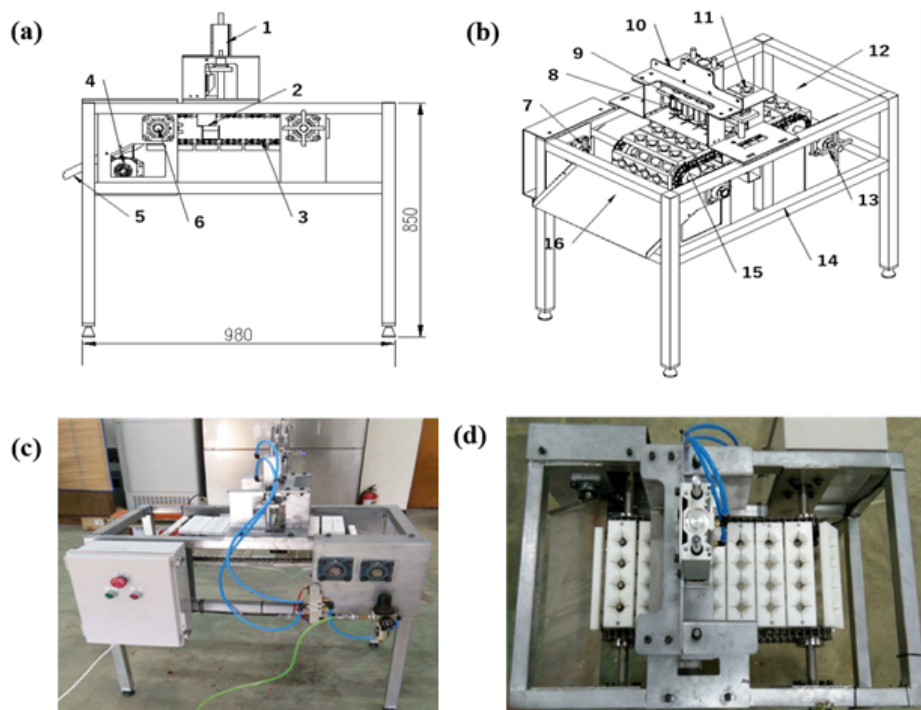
Design and appearance of PSR. (a, b) Schematics of PSR. The numbers indicate the main components of the machine: air cylinder (1), seed collector (2), transmitting chain (3), induction motor (4), flesh outlet plate (5), transmitting shaft (6), Geneva gear (7), cutter (8), cutter attachment plate (9), cylinder support (10), plum positioning hole (11), plum input portion (12), sensing plate (13), main frame (14), plum holding and conveyer tray (15), and flesh outlet (16). (c) Side view of the PSR. Programmable air pressure controlling components were attached to the side of the mainframe. (d) Top view of PSR showing the overall setup of the machine.
